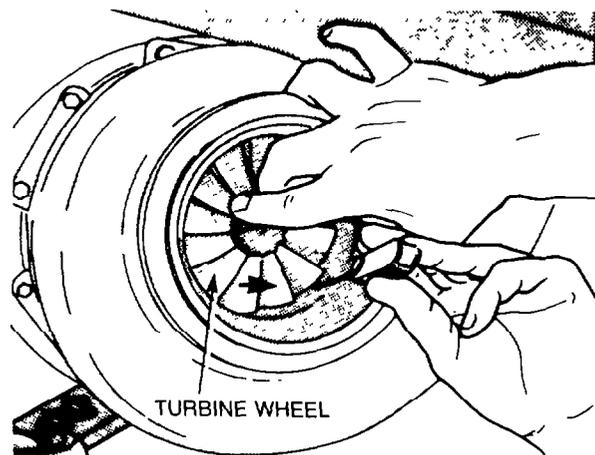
Measuring Turbine Wheel to Turbine Housing Clearance
